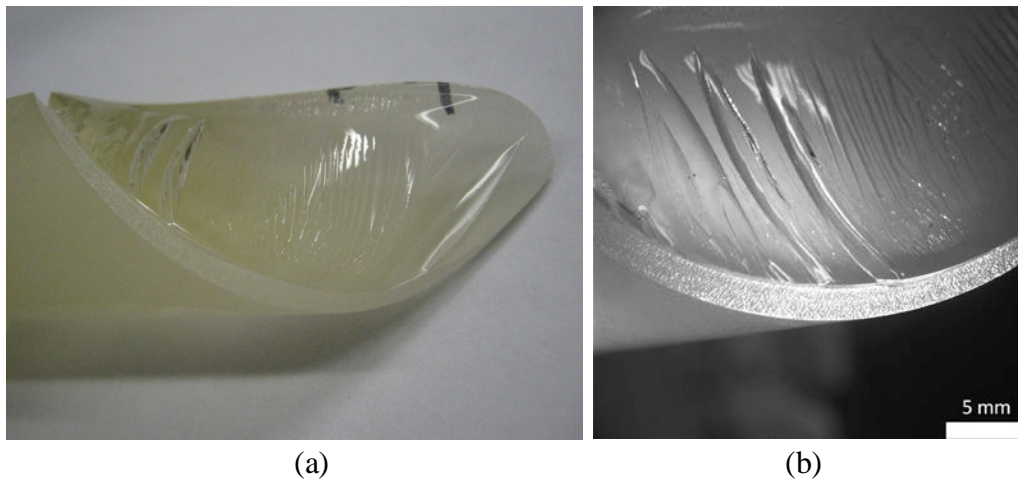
Optical microscope images of the fracture surface of sample GB4-7, a mixed mode sample (pitch angle = 36°) fractured without fatigue.
